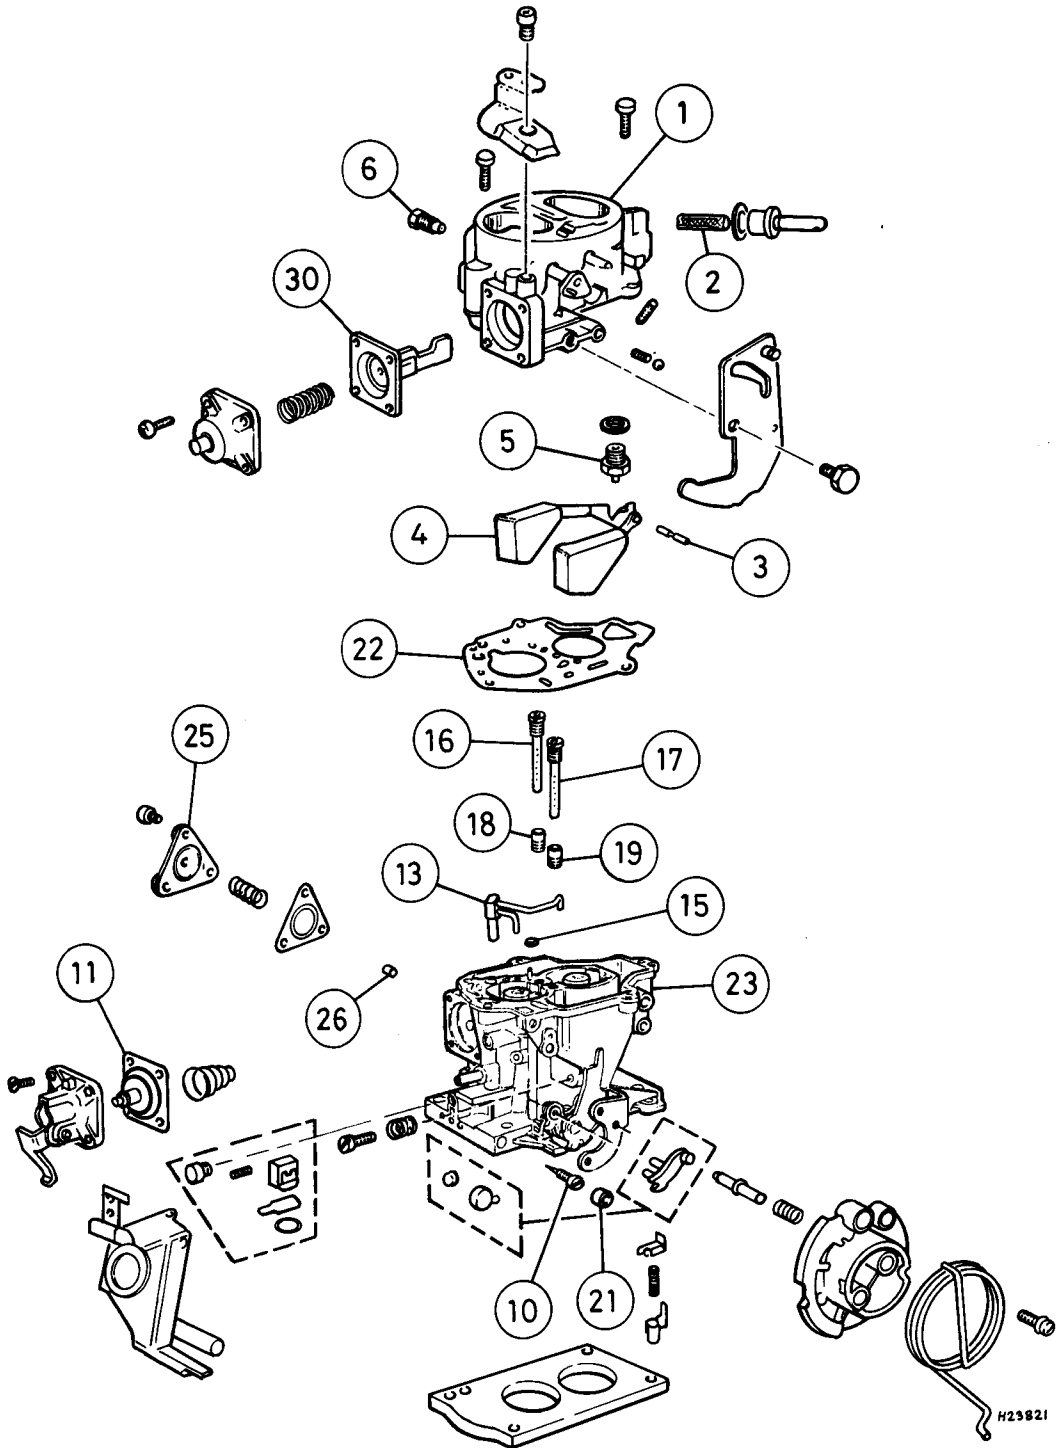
Exploded view of Solex Z2 carburettor (Sec 3)
